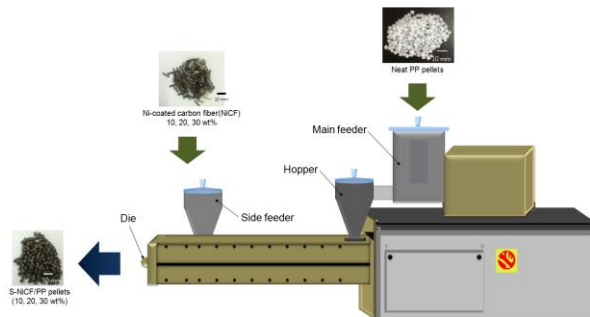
Twin-screw extrusion processing for producing NiCF/PP pellets through a sider feeder.
